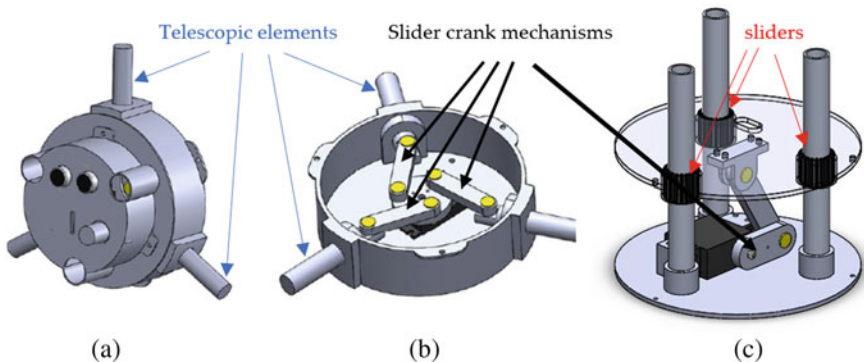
Proposed PEIS design comprised of three main modules: a the front module, b the pipeline grasping module utilizing three slider-crank mechanisms to actuate the telescopic elements using a single motor, and c the central body driving module employing one slider-crank mechanism and three sliders
